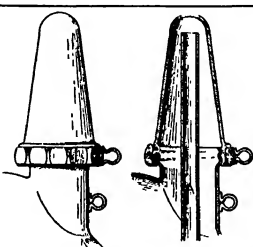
This queer looking radiator cap serves the double purpose of condensing the steam rising from the radiator and preventing hot water from being carried away with the steam.
